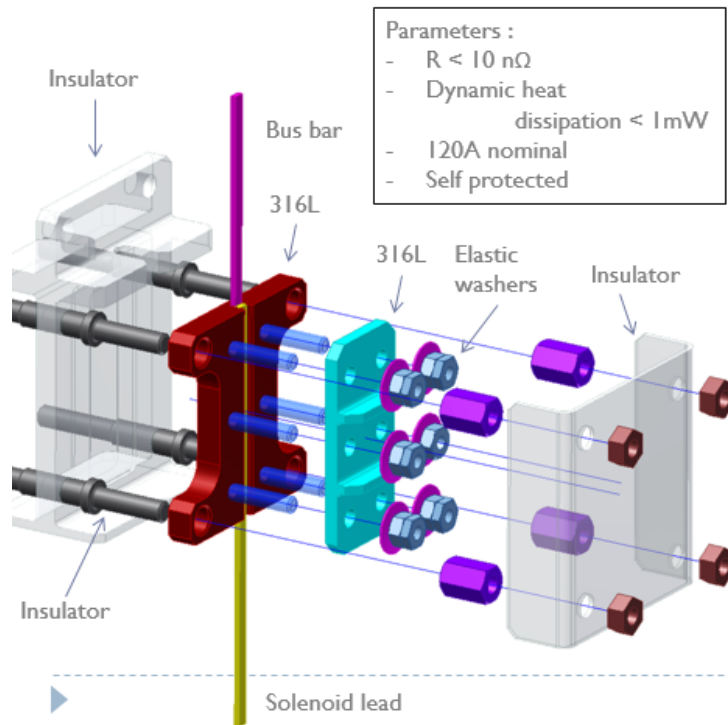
Key components of the mechanical resistive splice assembly.
